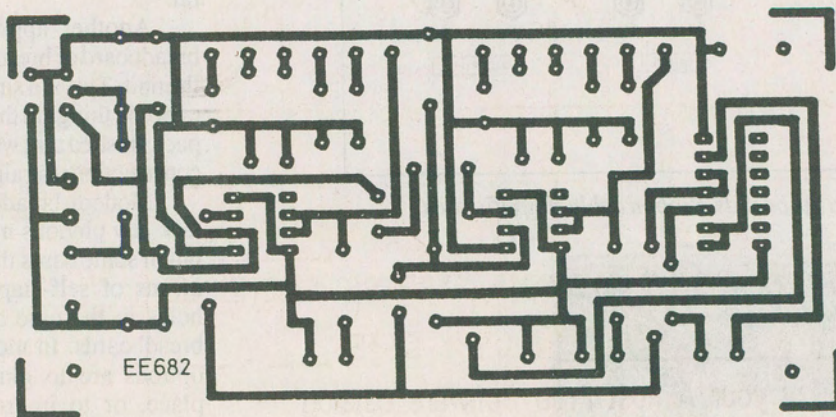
Pulse Generator PCB component layout and copper foil master pattern.
